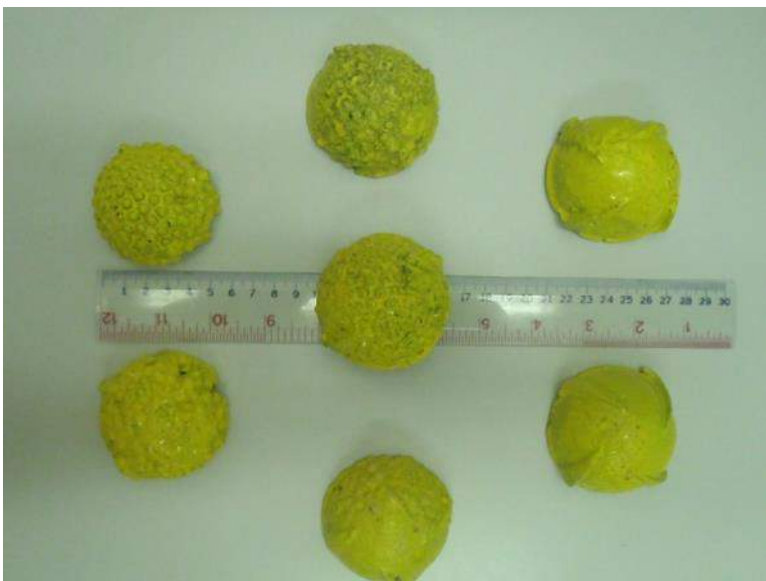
Half BLU 26 Inert Test Pieces - Outside View
